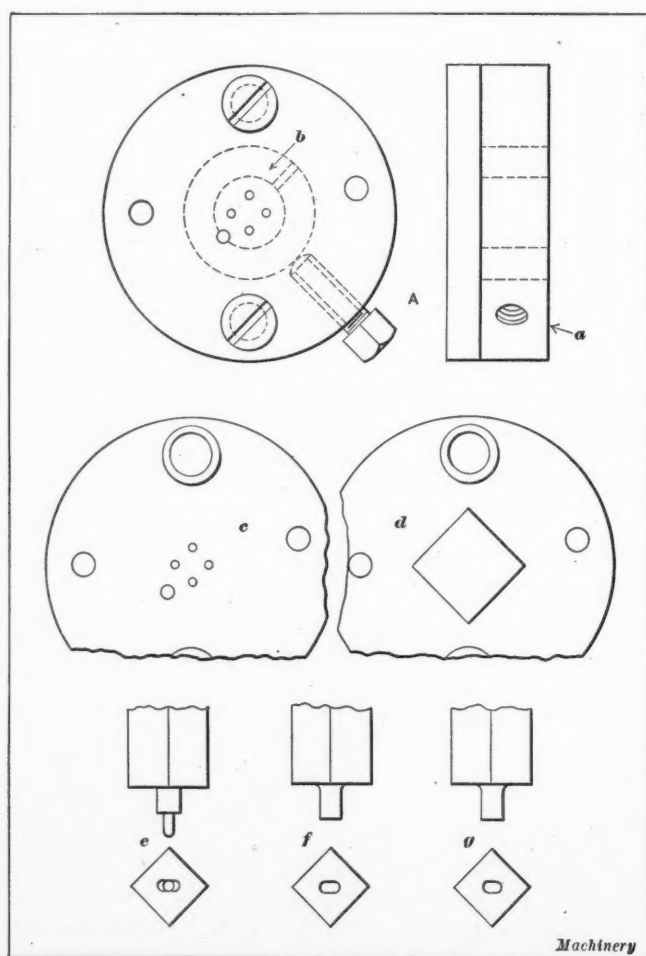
Fixture and Broaches for making Piercing Dies for Stud
